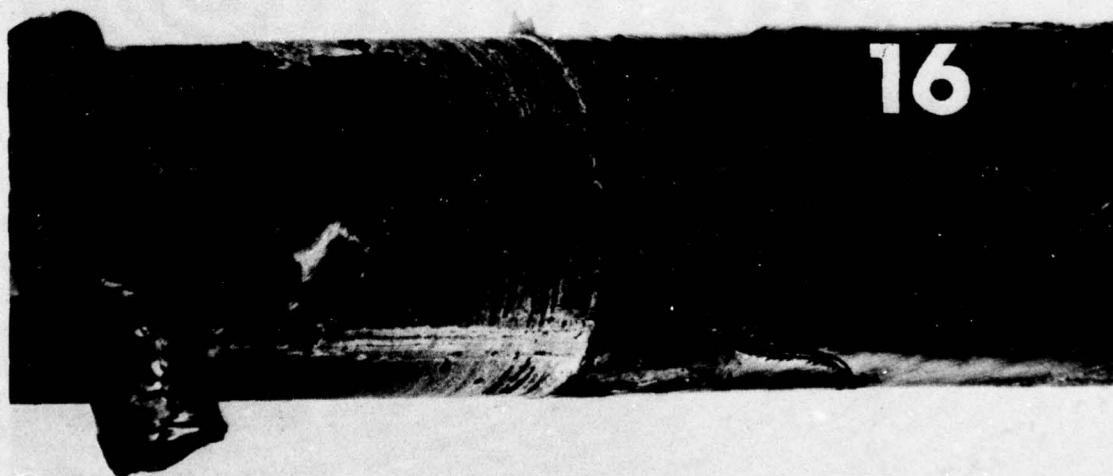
FAILURE FROM DRIVE PIN HOLE
